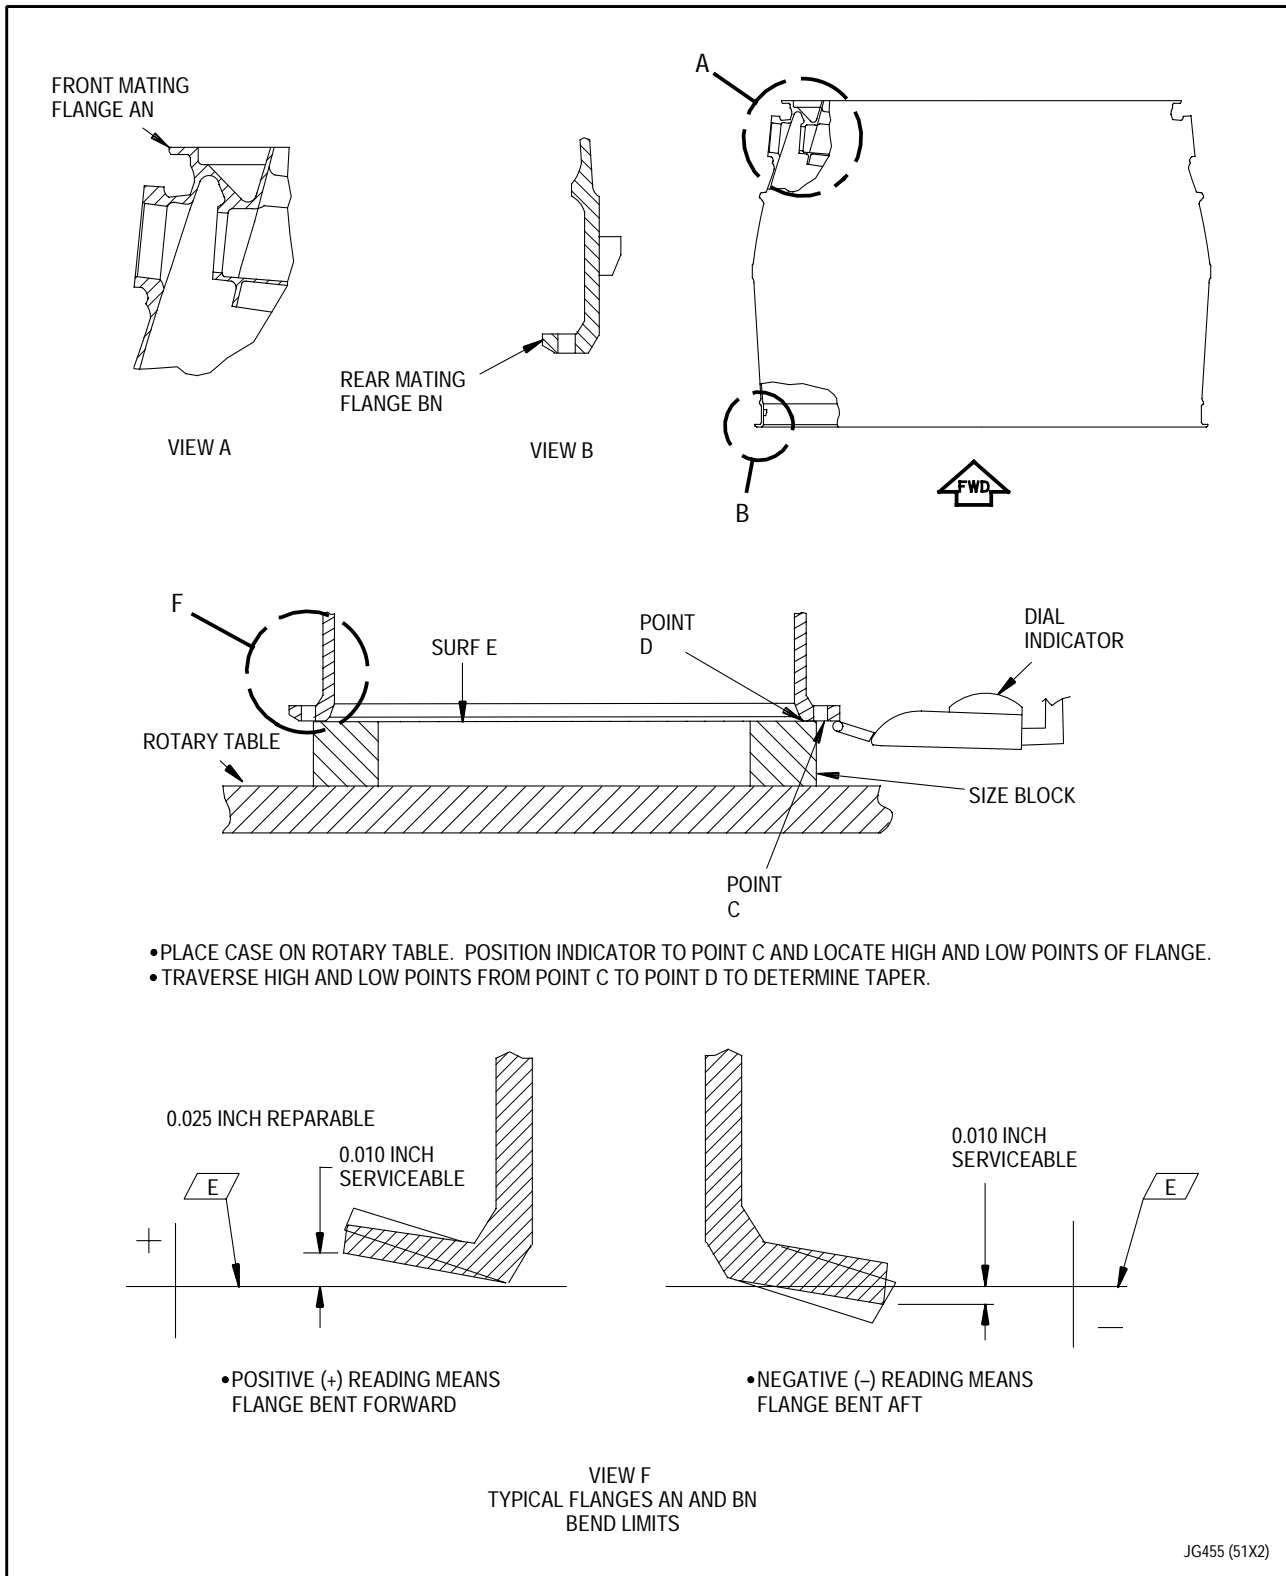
Diffuser Case Assembly - Inspection For Bent Front and Rear OD Flanges
